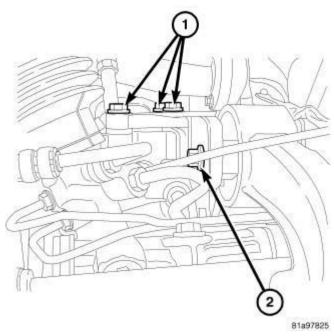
Identifying Rear Mount Bracket-To-Transaxle Case Bolts Courtesy of CHRYSLER LLC
